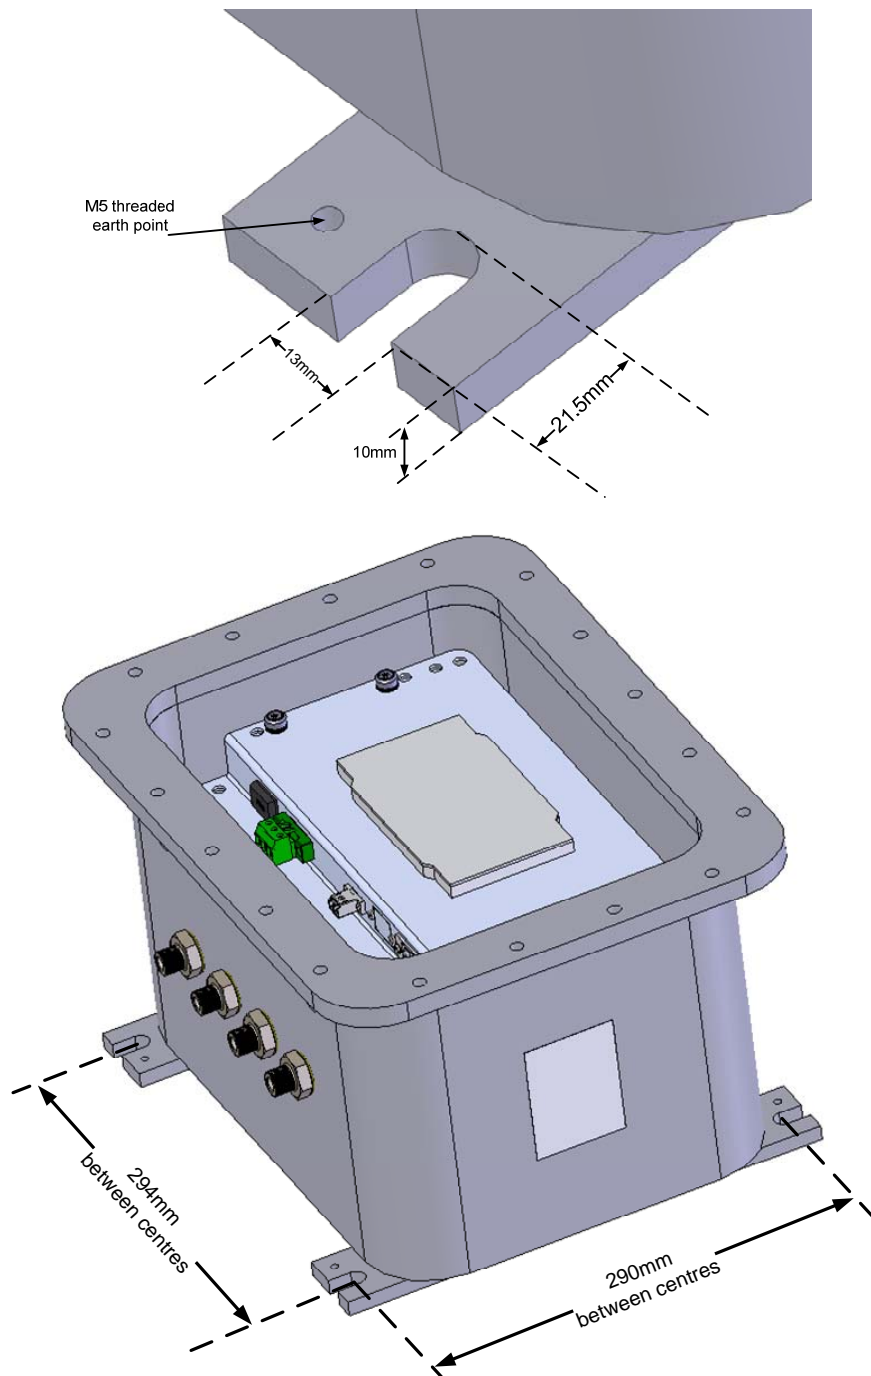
iWAP107 Stainless Steel Enclosure Mounting Points
